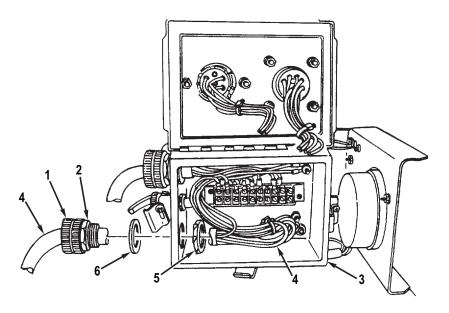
Rear Dolly Taillight Assembly Cable Assembly Internal Disconnection.
